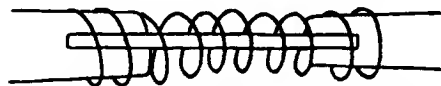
COUPLING CONNECTING PUMP AND CAMSHAFT ON PRIMA CAR.
